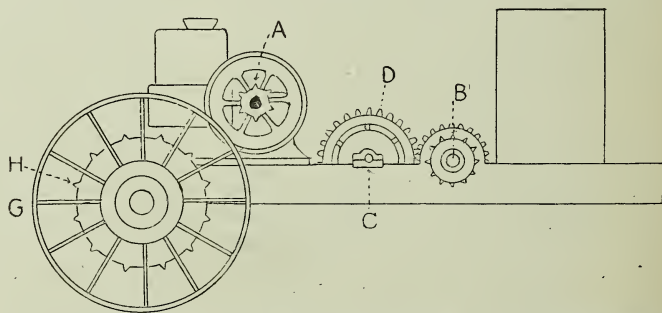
A, engine-shaft with 8-inch sprocket; B, counter-shaft with 24-inch sprocket and small gear-pinion at center of shaft; C, differential shaft with differential, D, between tractor-sills, and carrying small sprocket wheels (not shown in cut) at each end for belting to bull-sprocket H on the inside of drive-wheel G. Chain between A and B works just inside the chain from C to H between bull-drive chain and sill.
